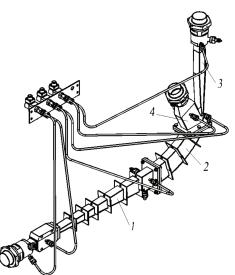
Jet liquid cooler (JCL): 1 – confusor-diffuser nozzle; 2 – surface separator; 3 – diffuser, 4 – vapor pipe
